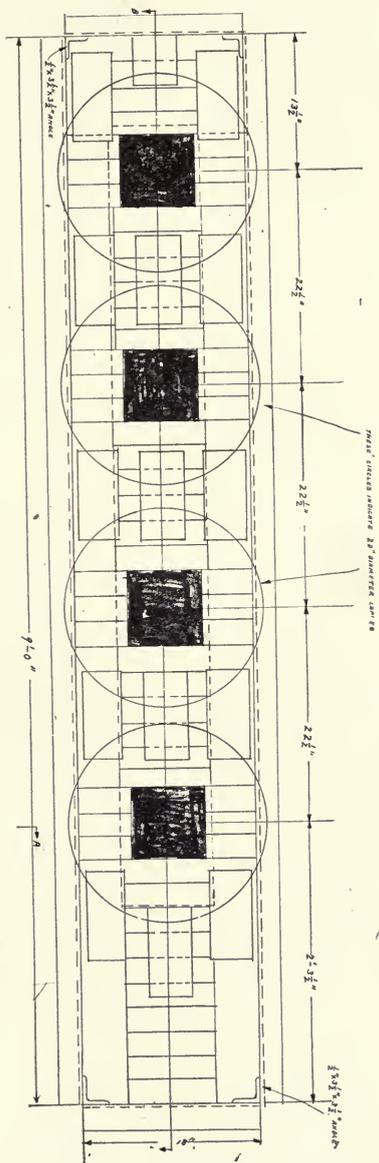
A Ladle Heating Furnace with which four Bull Ladles are heated with one burner.
